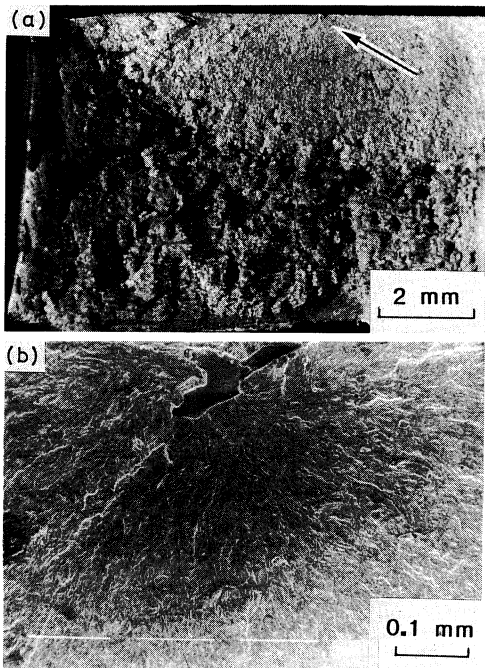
Scanning electron micrographs of the fatigue fracture surface. Arrow in (a) indicates the origin of fatigue crack which enlarged to (b) showing small casting defect.
